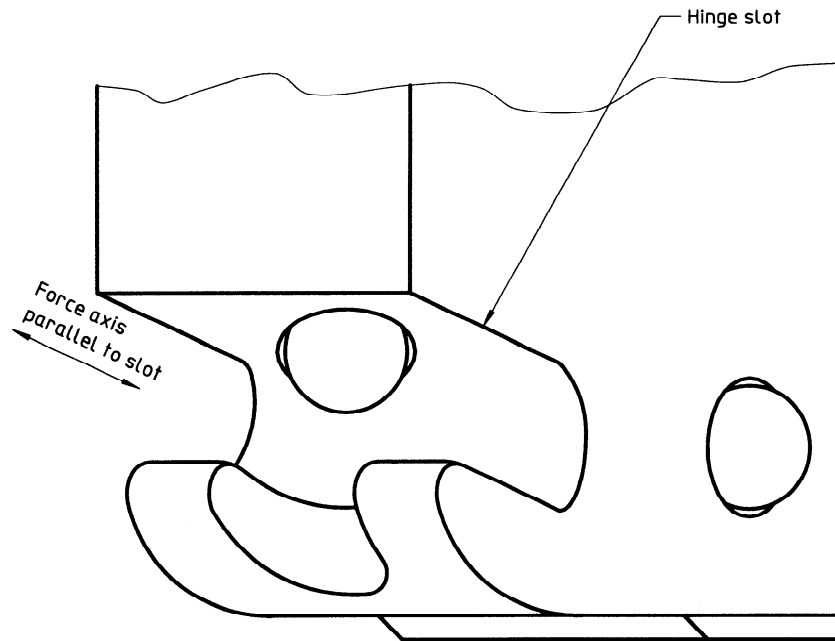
Force axis for engagement/disengagement tests (see 3.5)
